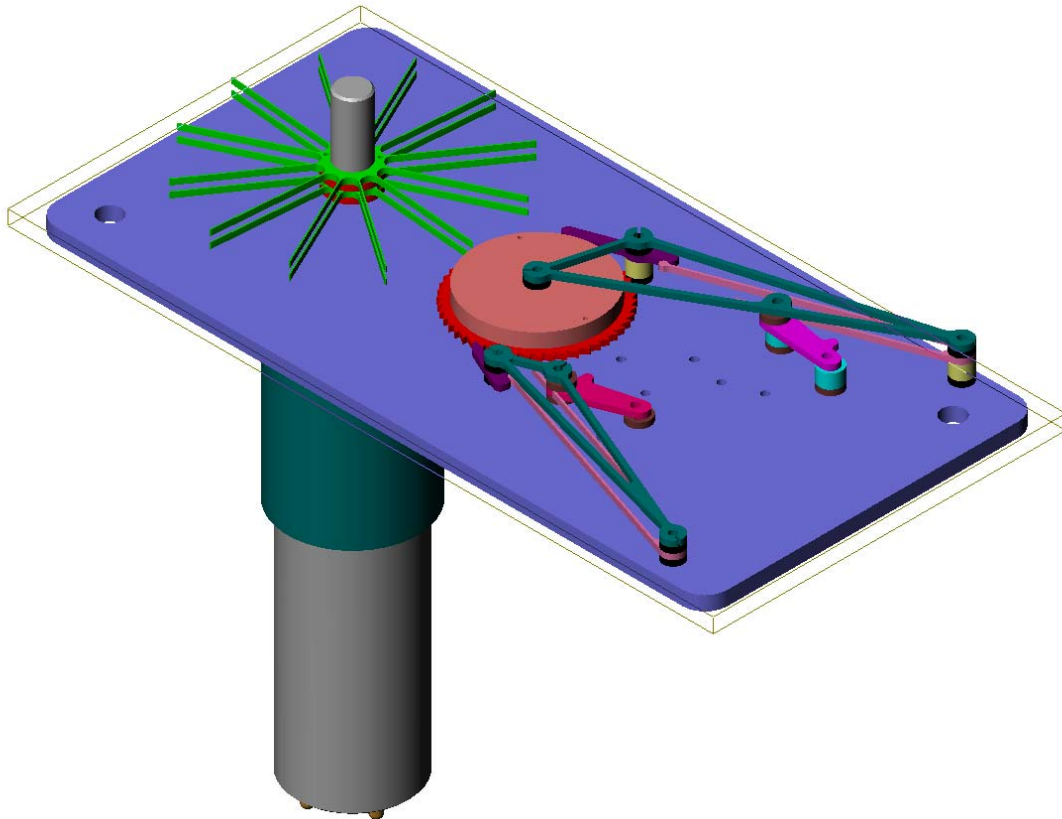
Tribology test vehicle. The purple pawl engaged on the left side of the ratchet gear is the part shown in the figures below.
